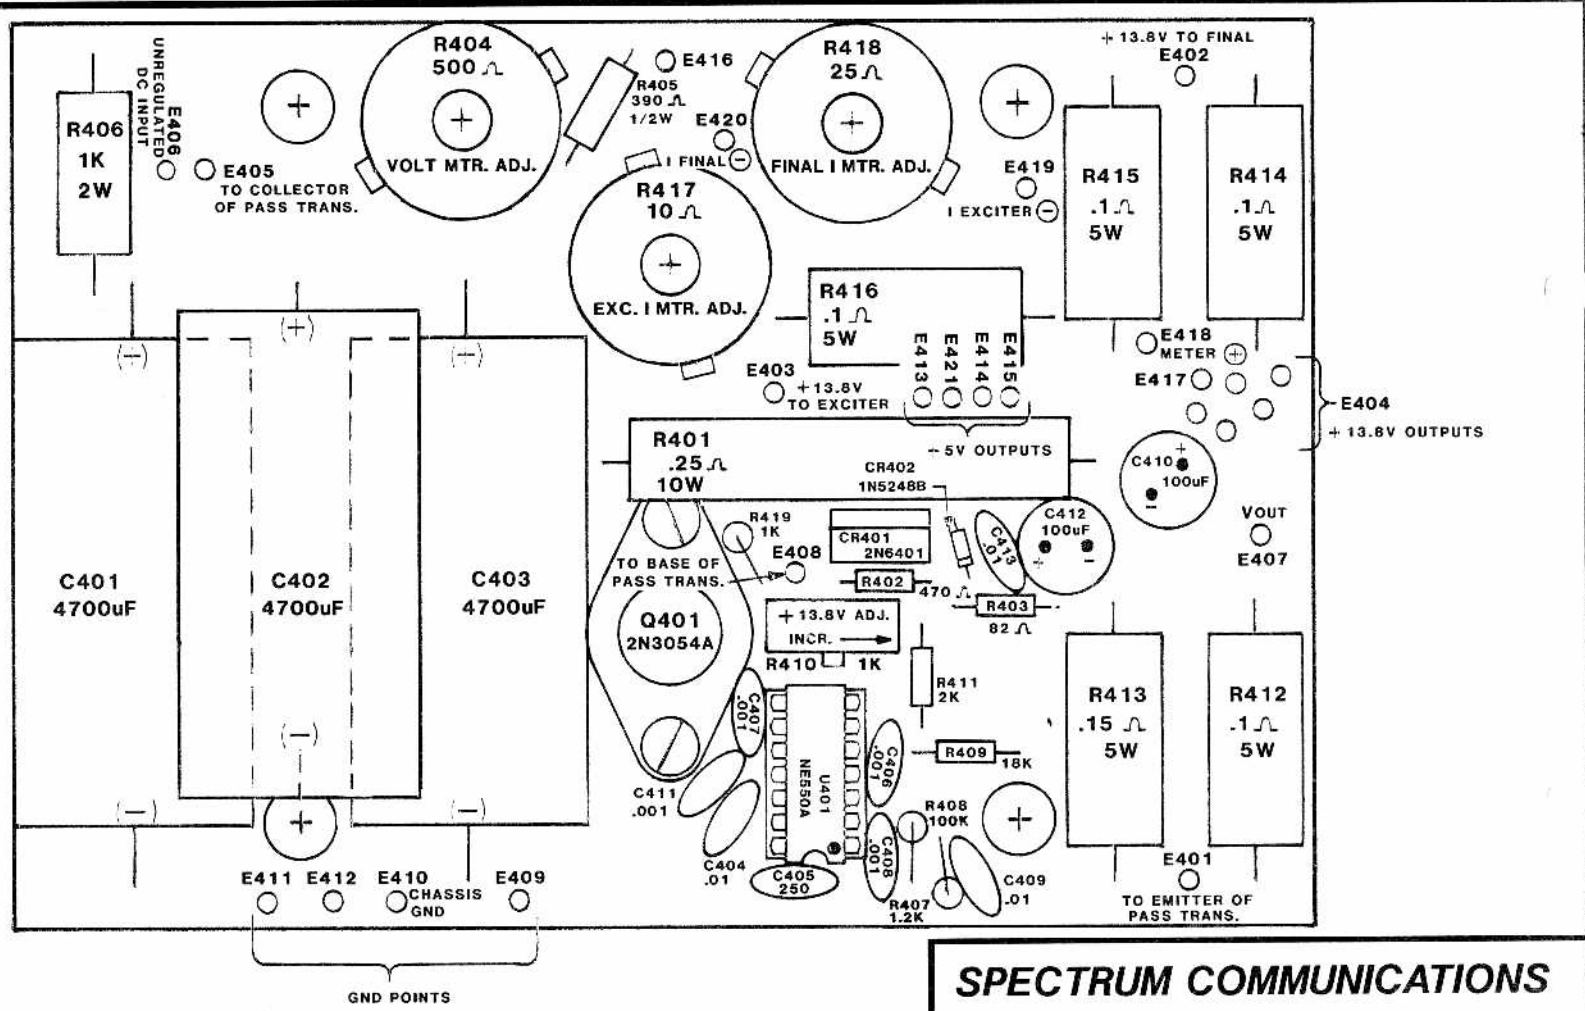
POWER SUPPLY BOARD LAYOUT
